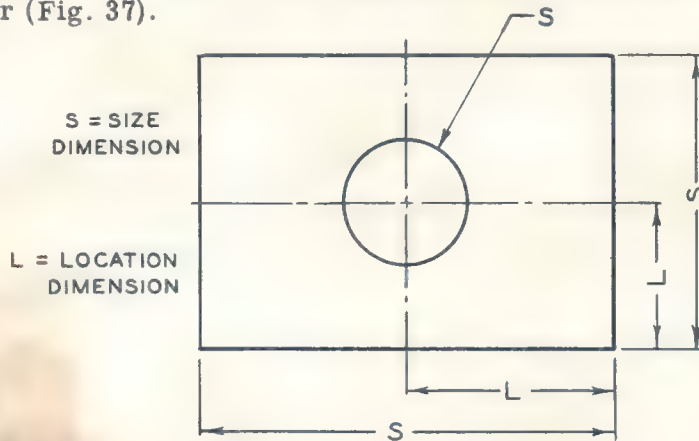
DIMENSIONS INDICATING SIZE AND LOCATION
